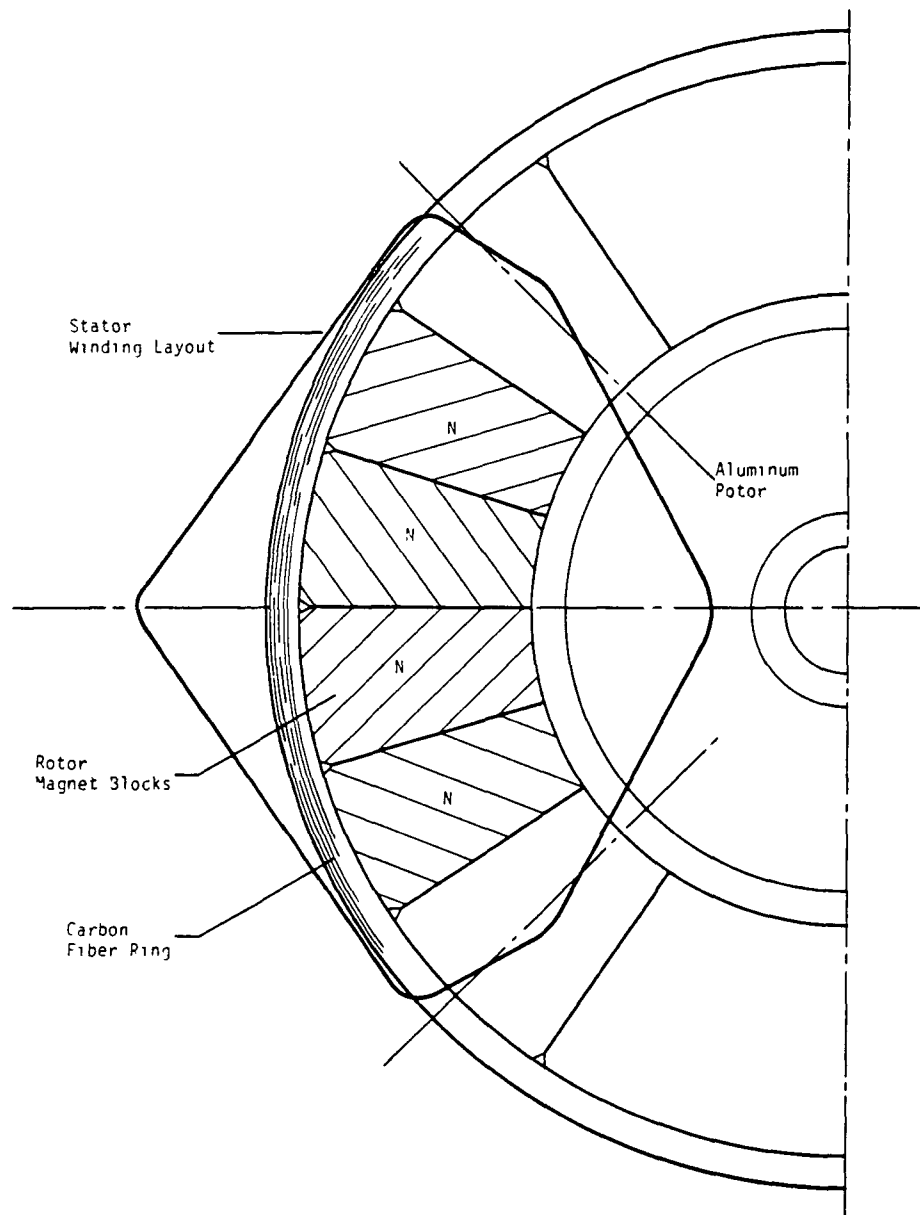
Preliminary Design Disc Motor for Electric Car – Pole and Coil Layout
